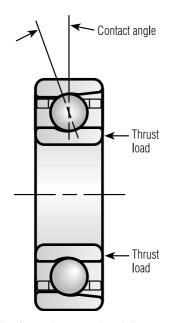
Contact angle refers to the nominal angle between the ball-torace contact line and a plane through the ball centers, perpendicular to the bearing axis.
